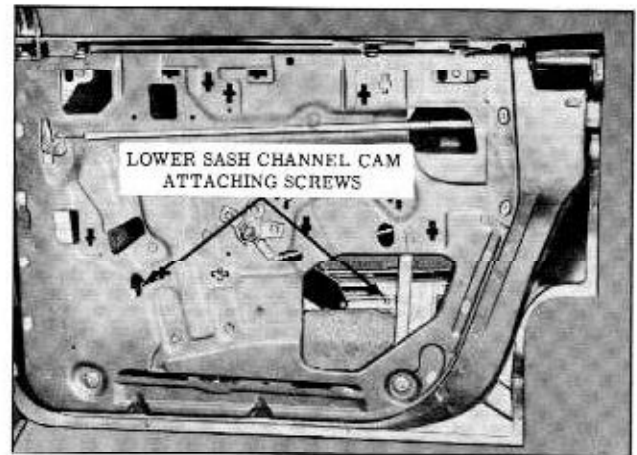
Rear Door Lower Sash Channel Cam Attachment
